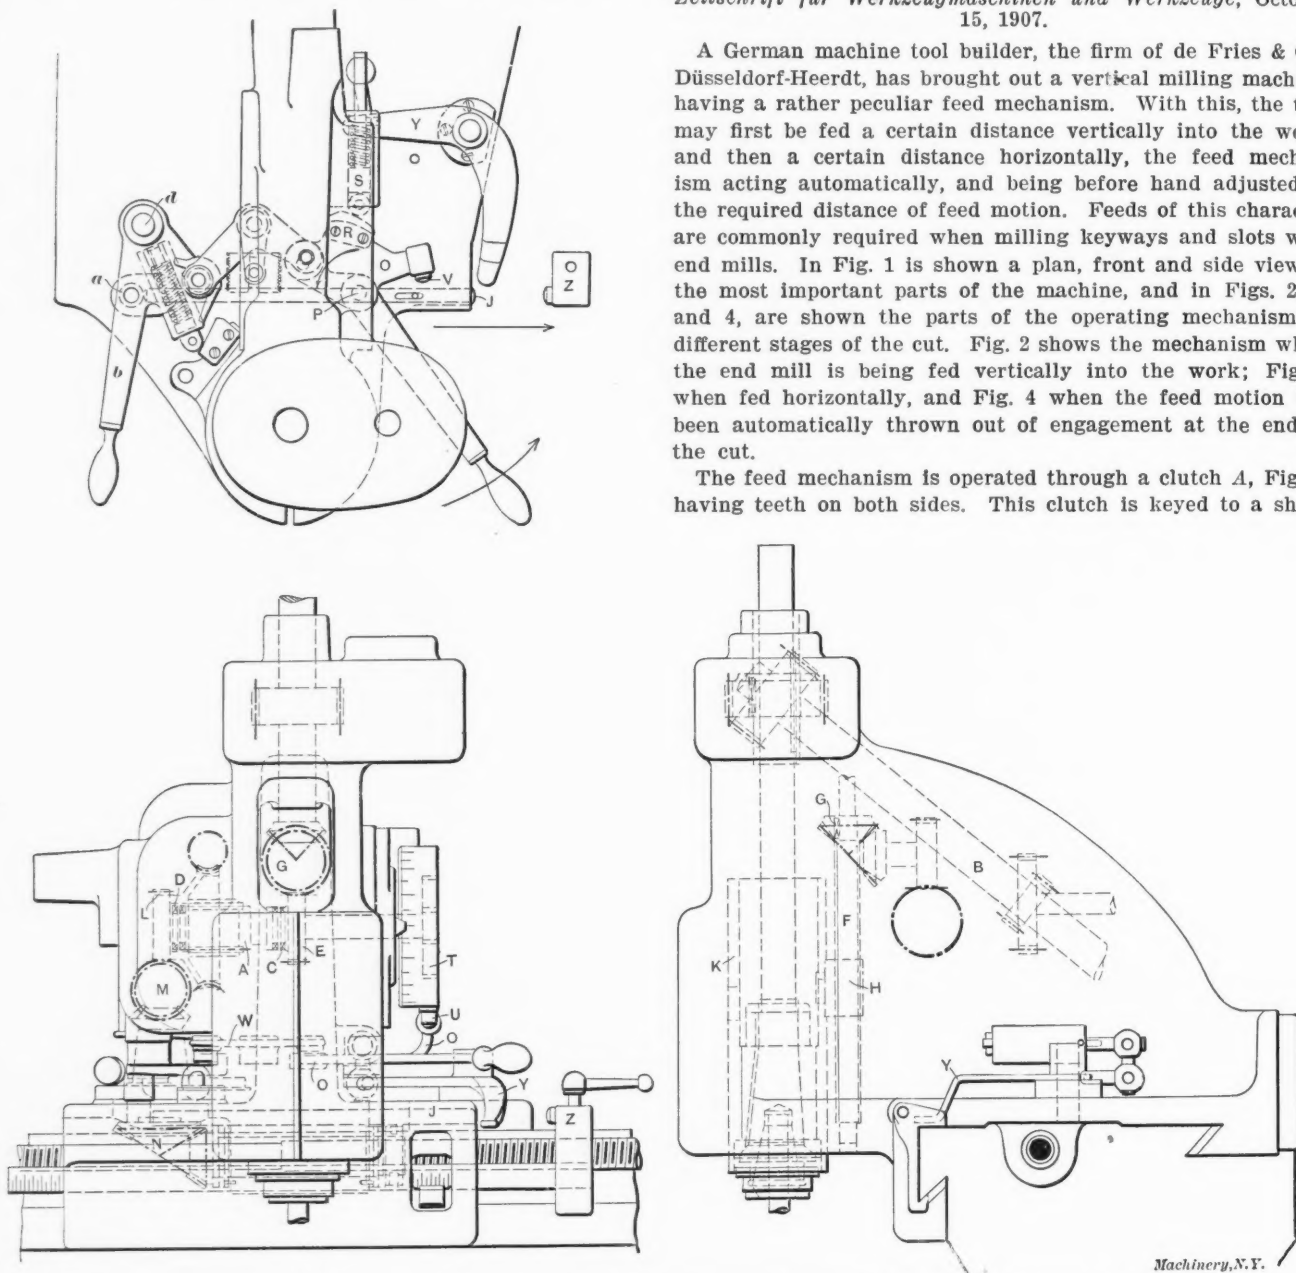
General Arrangement of Vertical Milling Machine with Combined Automatic Vertical and Horizontal Feed.
